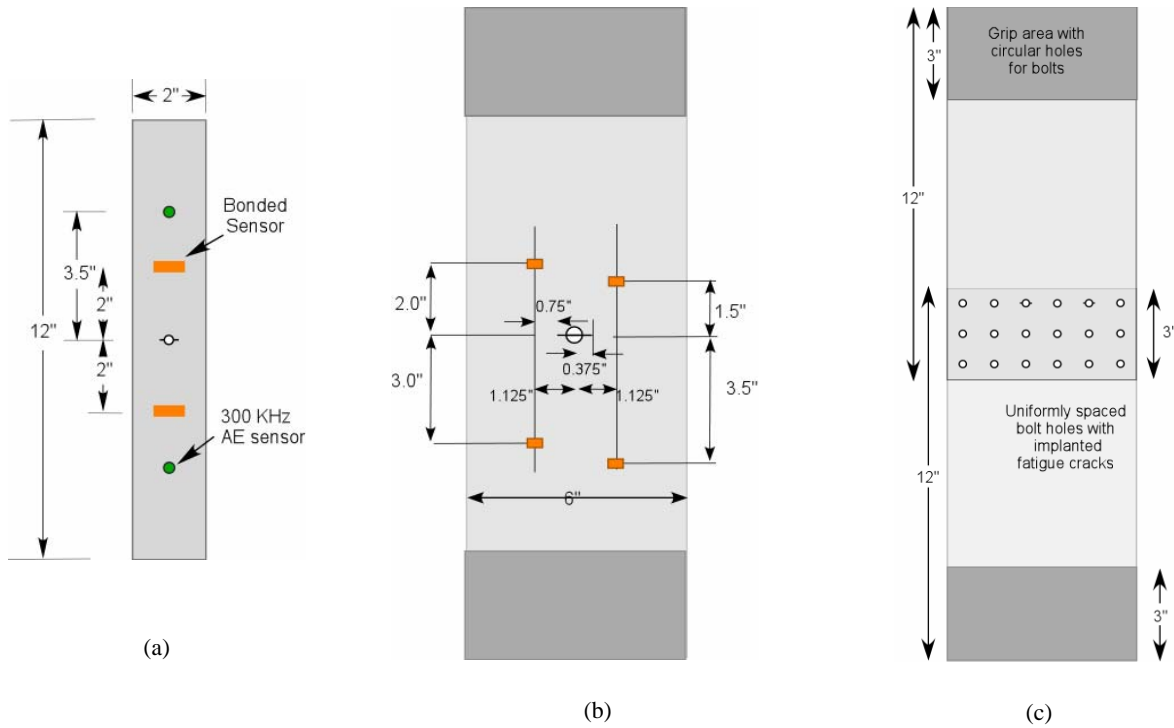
Specimens used for monitoring fatigue crack growth in 7075-T6 Aluminum: (a) 2-inch wide coupon with central crack, (b) 6-inch coupon with central crack; and (c) 6 inch wide lap joint with a crack near a bolt hole. The thickness of all the specimens was 0.125 inches.
